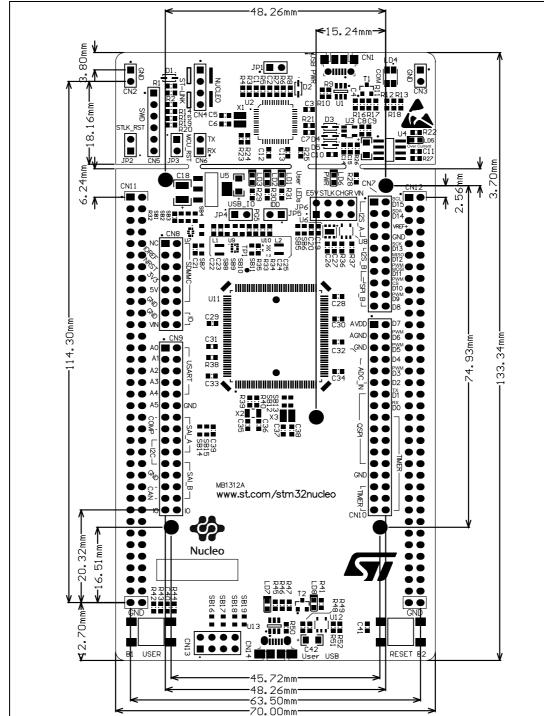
STM32 Nucleo-144 board mechanical drawing in millimeter
